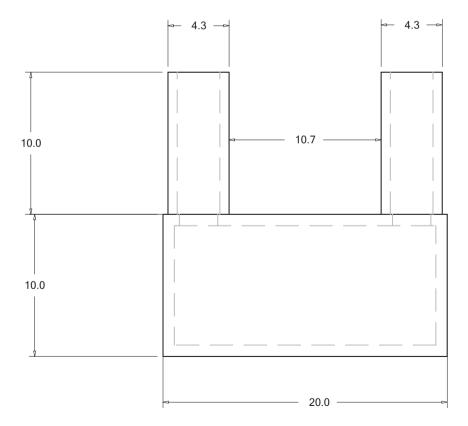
C2 Lower fitting to connect polyvinyl tubing.
